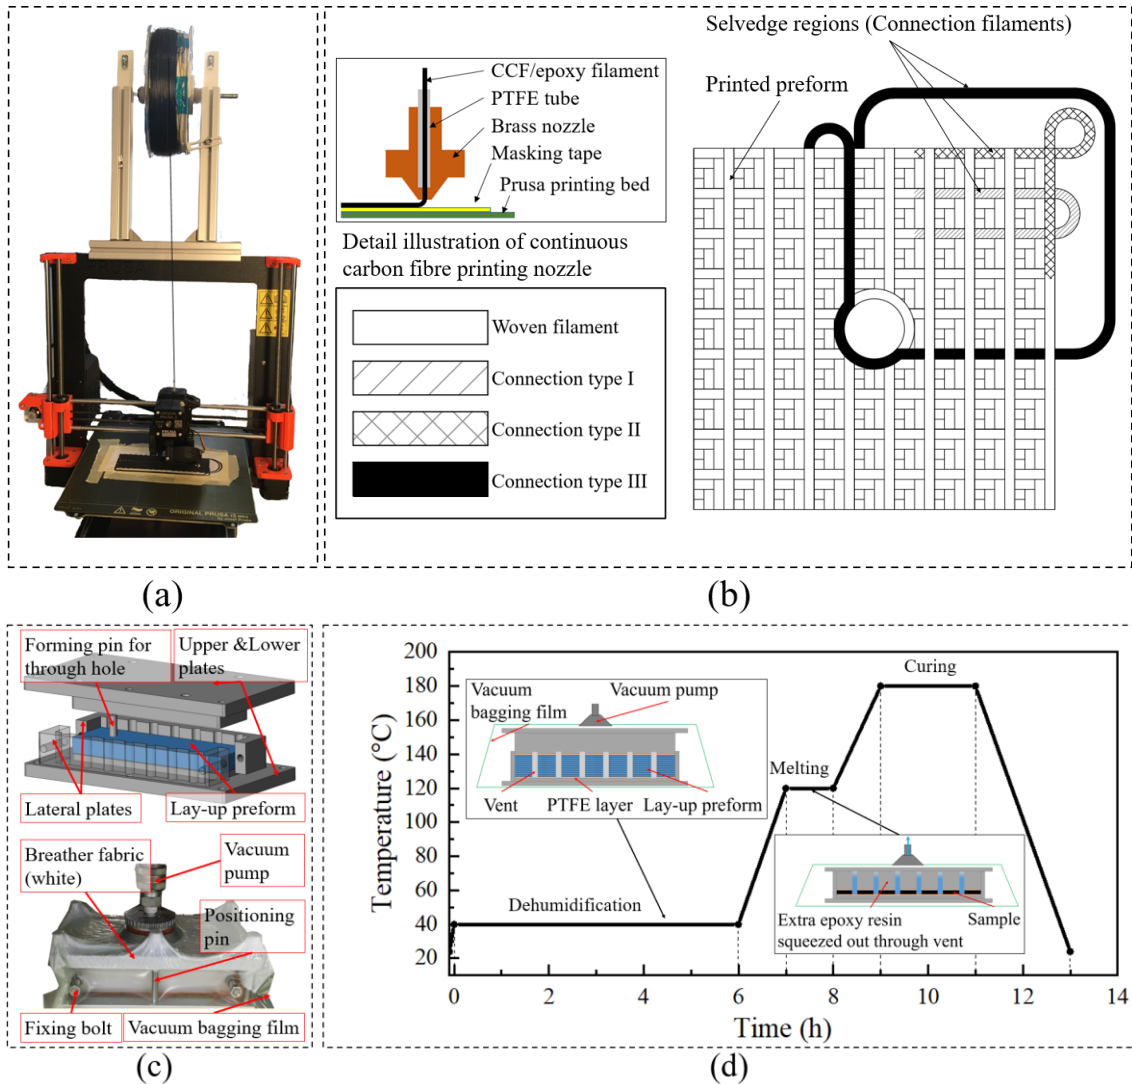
(a) Prusa i3 MK3S printer; (b) Connection of adjacent paths for continuous printing; (c) Components of the mould and vacuum bagging setup; (d) Heat cycling of oven curing.
